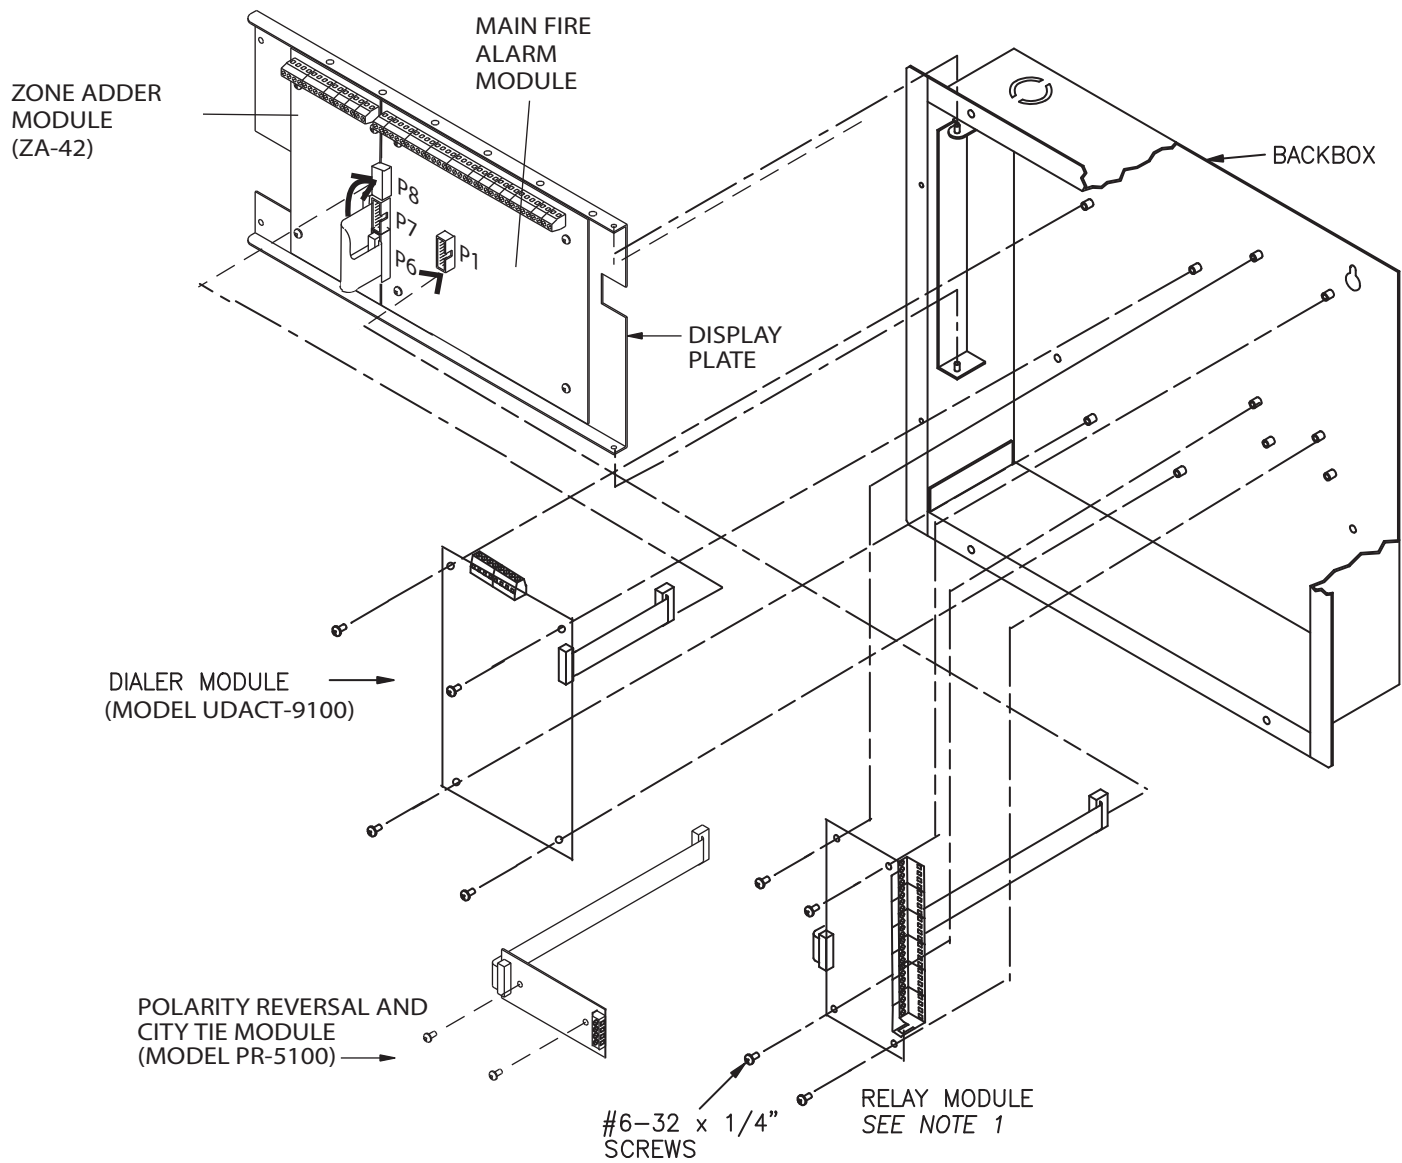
PFC-5002 and PFC-5004 Module Mounting Locations
